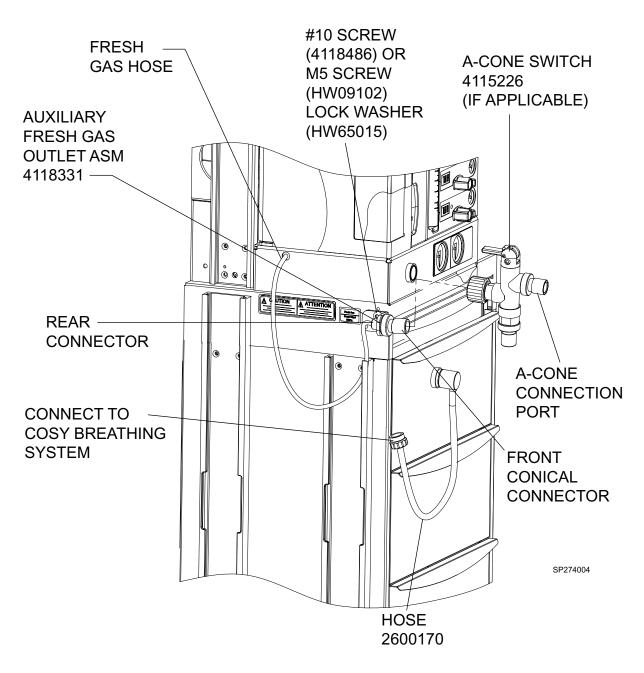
Left Side Trolley Mount Auxiliary Fresh Gas Outlet Installation
